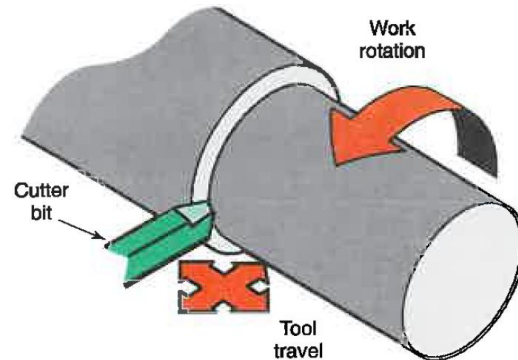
The lathe operates on the principle of the work being rotated against the edge of a cutting tool.
